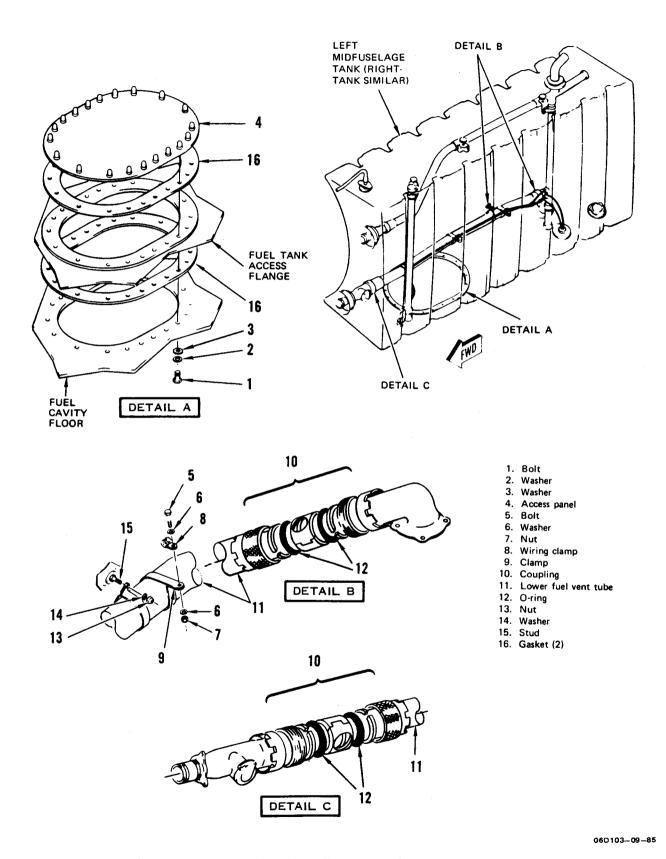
Removal and Installation; Midfuselage Tank Access
